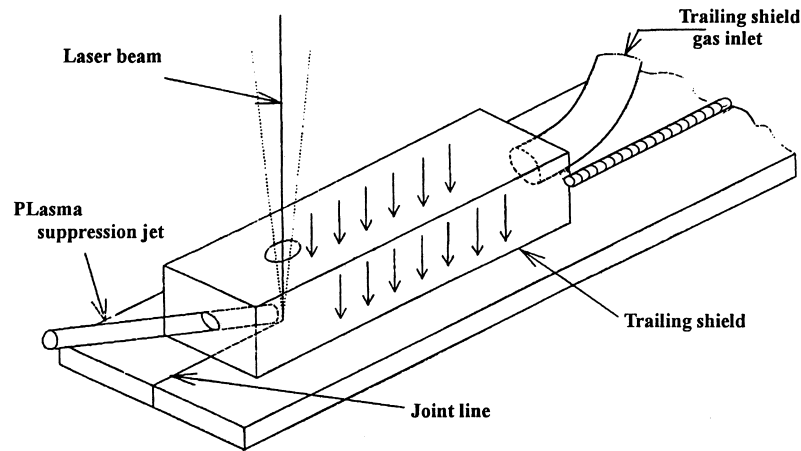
Schematic arrangement of laser welding for butt joints.
